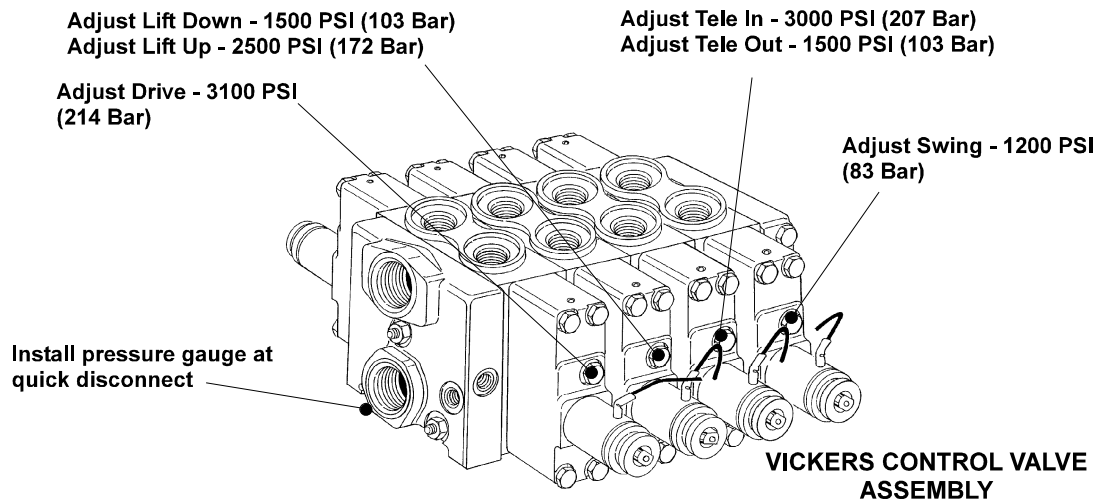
Pressure Setting - All Hydraulic Machines (Sheet 1 of 4)
